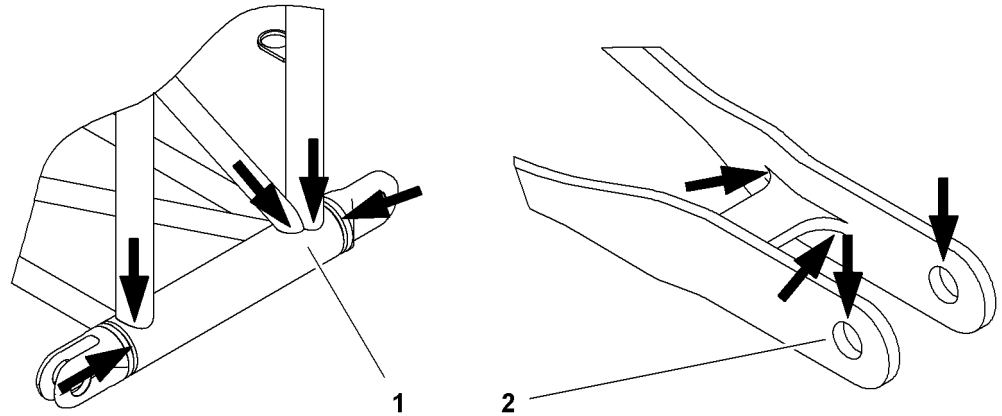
Excerpt from the drawings for checking the weld seams and holes
